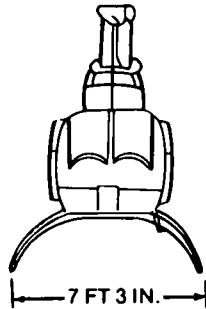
Principal Dimensions, OH-58C (Kiowa) High Skid Gear
